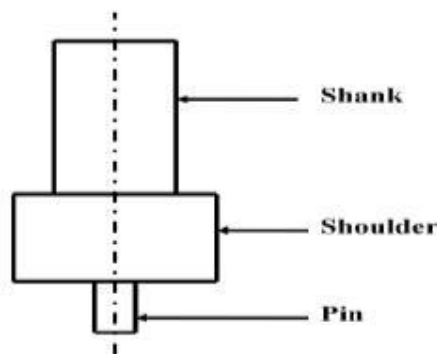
Various nomenclatures of FSW tool and Pin Geometry [2]
